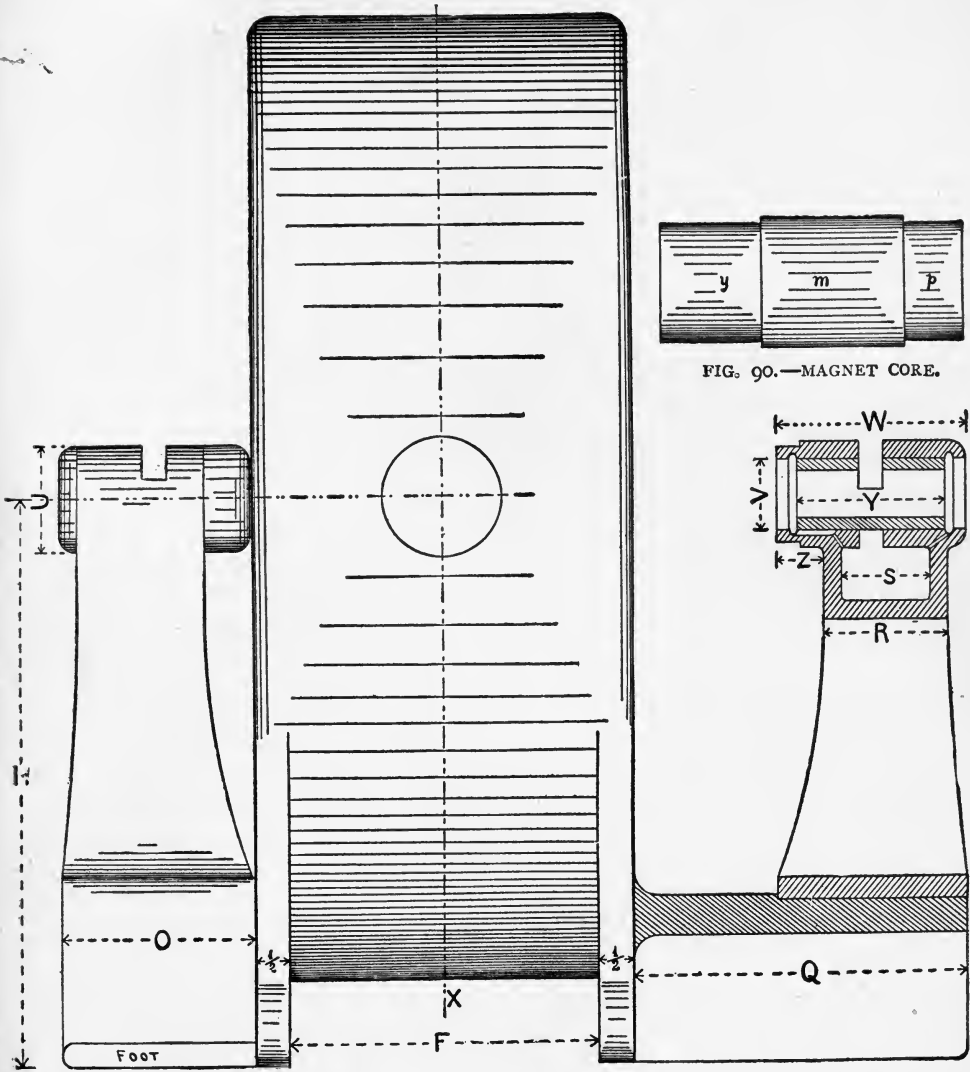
SIDE ELEVATION OF MAGNET FRAME AND SECTION THROUGH BEARING.
